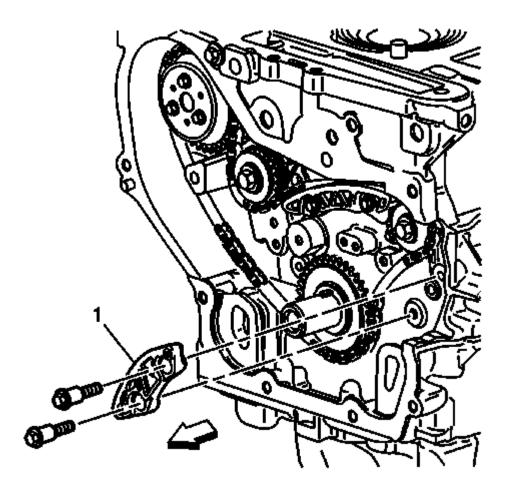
Balance Shaft Drive Chain Tensioner And Bolts Courtesy of GENERAL MOTORS COMPANY
